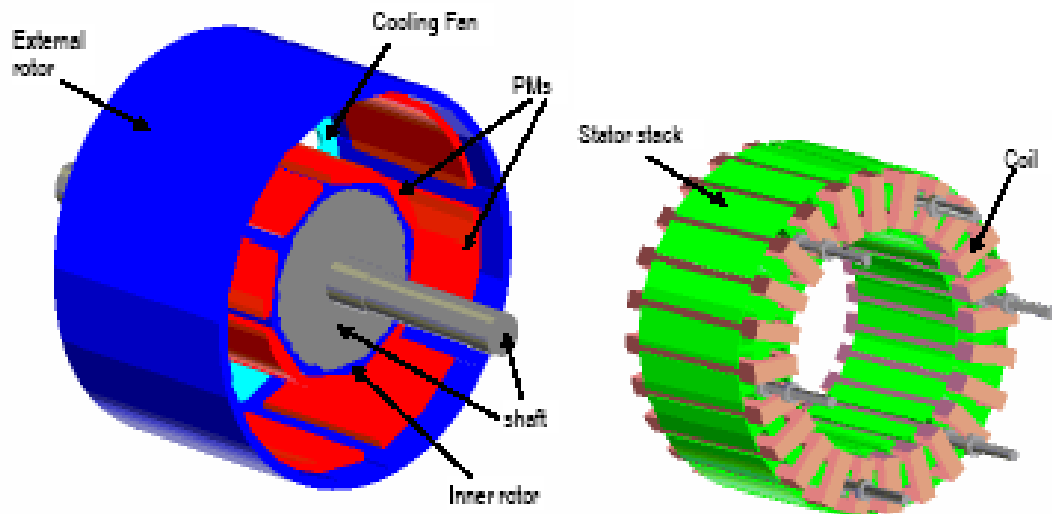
Three dimensional cross-sectional view of RFTWTRPM motor [8].
